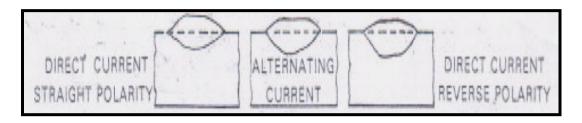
Comparative weld profile and depth of penetration after welding with different current conditions.
